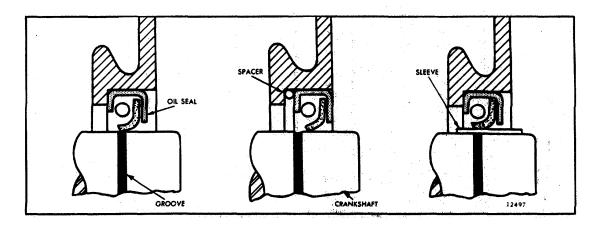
Use of Rear Oil Seal Spacer or Sleeve on Grooved Crankshaft
